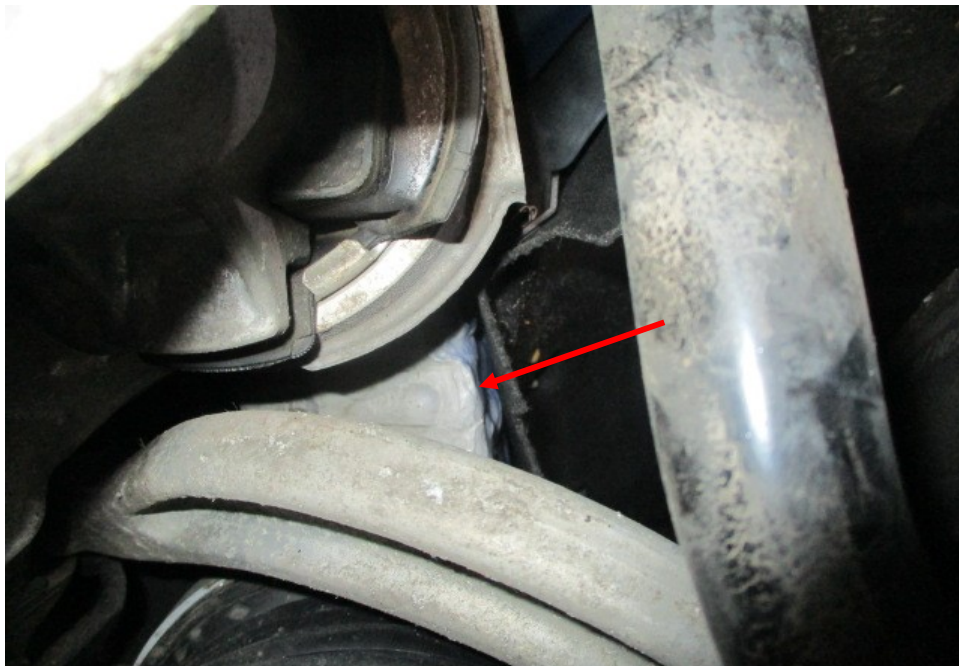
shows the chassis/structural body at the underside rear right of the Motor Car. I did not find any weld marks other than original spot weld marks on the chassis/structural body of the Motor Car. The original factory sealant (arrowed) at the joints along the chassis/structural body was untouched, indicating no work was done on the chassis/structural body of the Motor Car and that the chassis/structural body was originally fitted.
